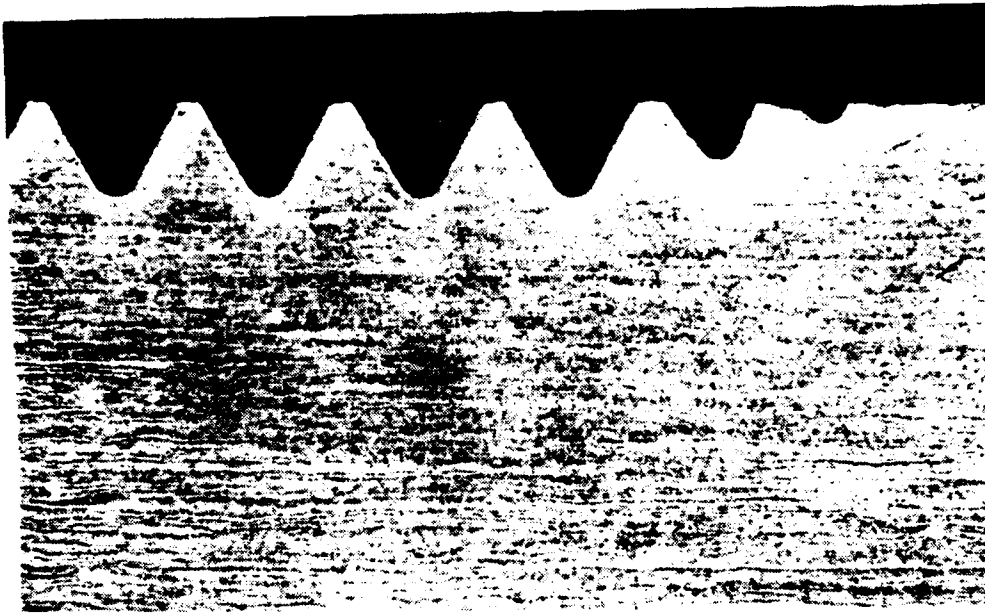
Macrograph of the macrostructure of a representative 0437 bolt thread region. Flow lines were indicative of machined threads. Mag. 12.5X.
